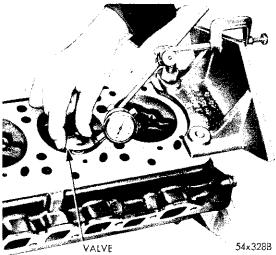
Checking Valve Guide Clearance (SpitFire) (Typical of FirePower)
